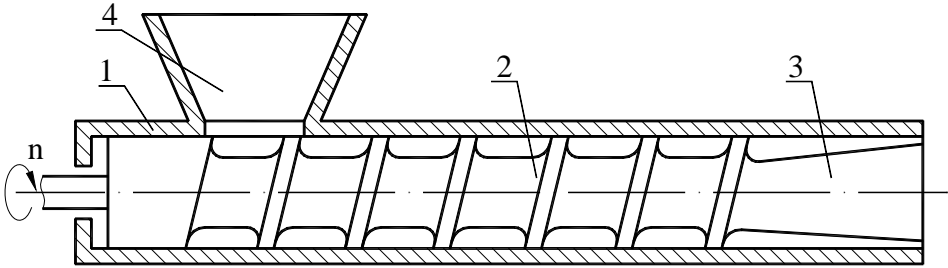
Extruder for waste processing: 1 – casing; 2 – screw; 3 – screw head; 4 – hopper [23]
